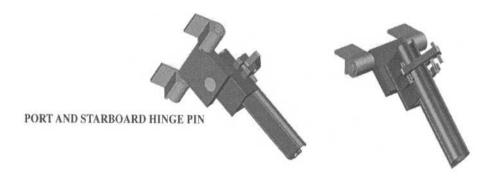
HINGE ASSEMBLY FOR THE CHUTE.
